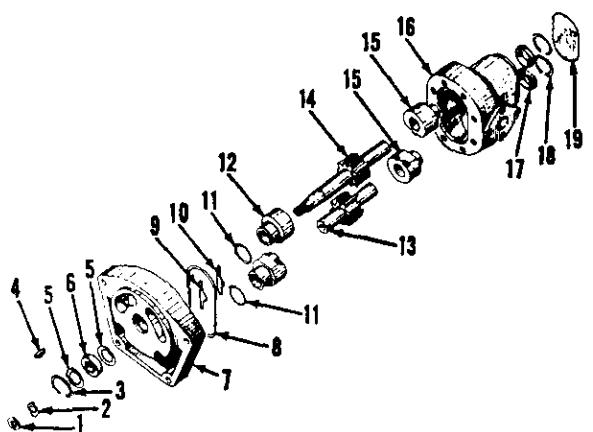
Exploded view of the Series B-275 engine driven hydraulic pump. Some pumps do not include items (17) and (18).
